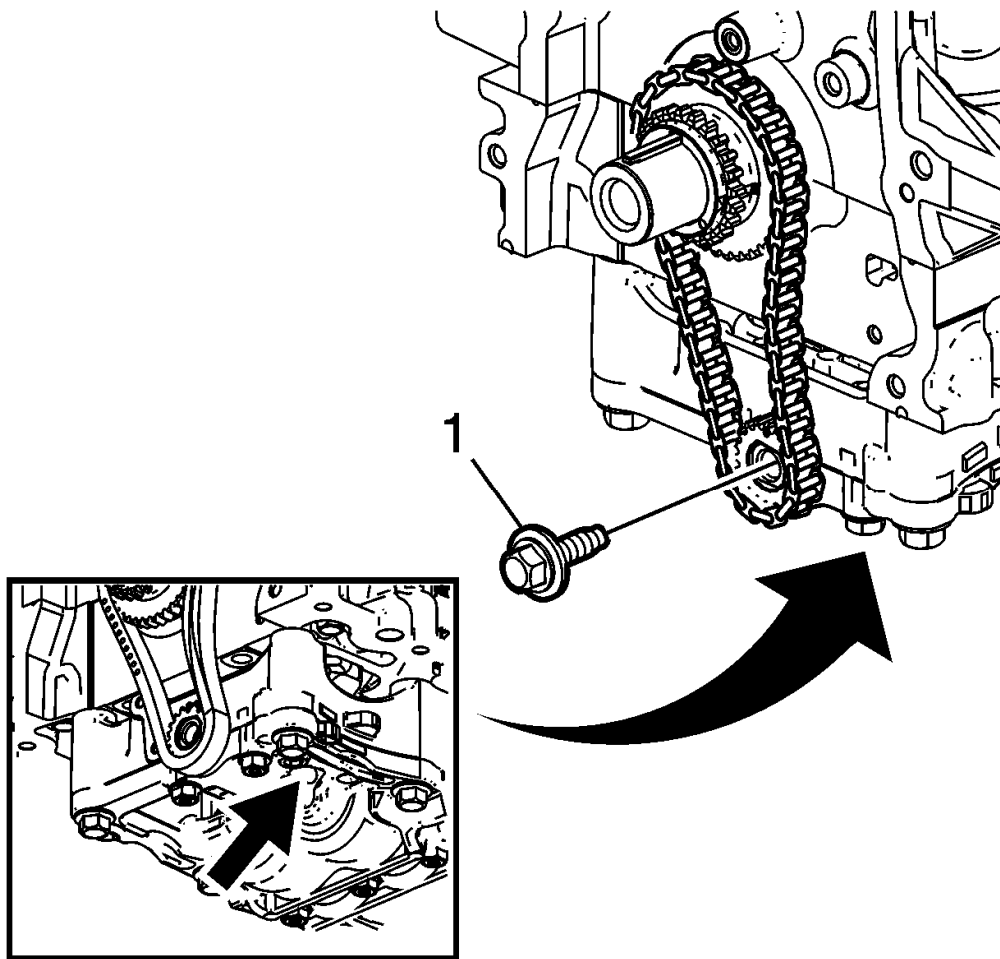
Balancer Shaft Driven Sprocket Bolt
